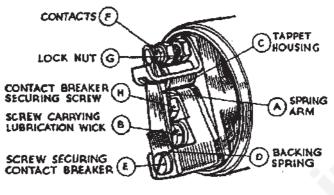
CONTACT-BREAKER COMPONENTS .
